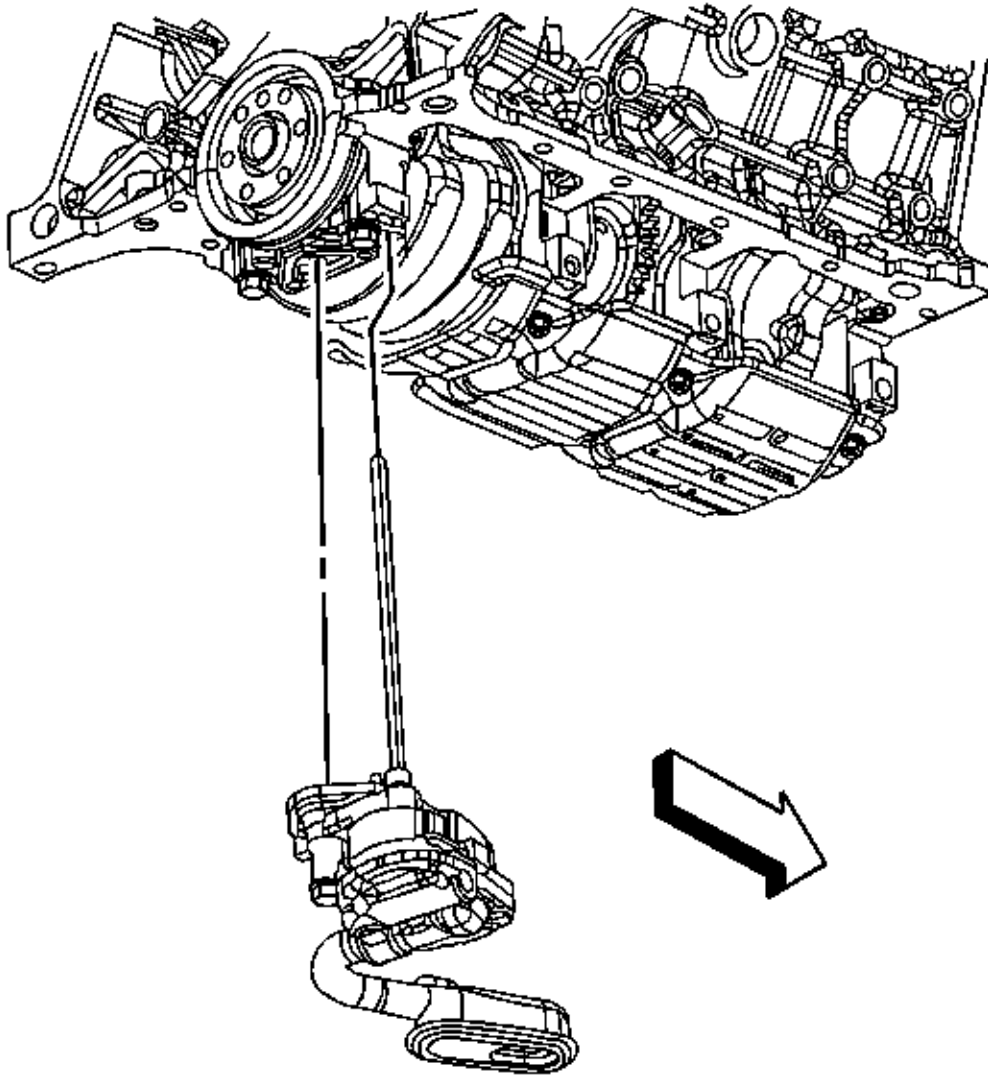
Identifying Oil Pump & Oil Pump Drive Shaft
